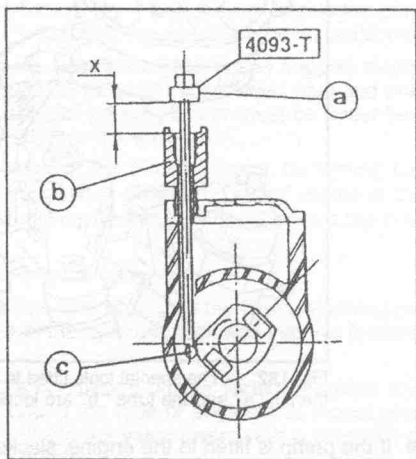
Sectional view of the injection pump (refer to text).
